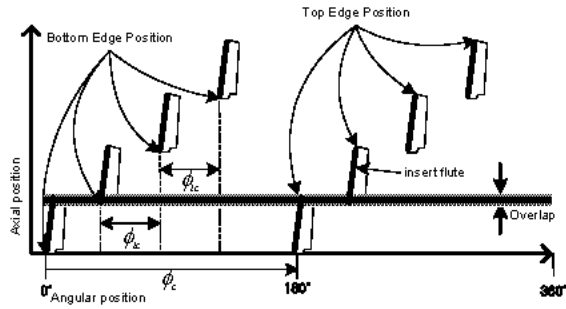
Cutter edge location of Indexable end mill. (AMS2025M)
